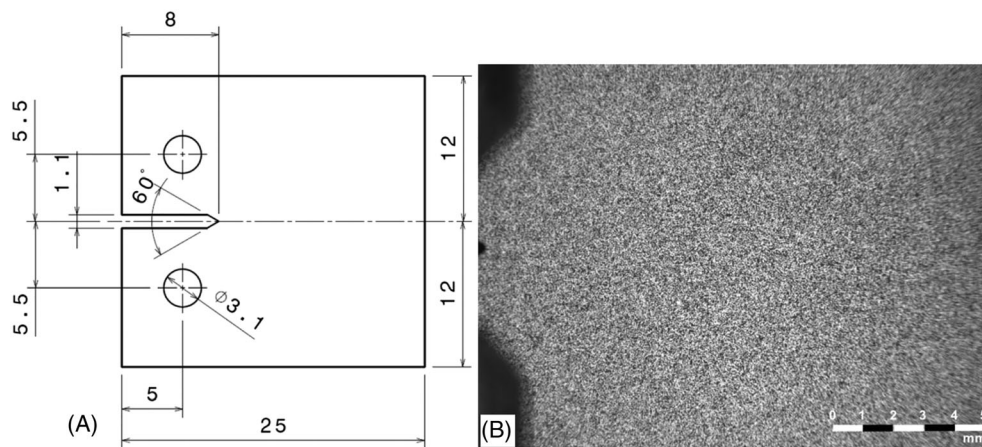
(A) Dimensions of the CT specimens (mm). (B) Illustration of the speckle pattern sprayed onto the specimen surface for making DIC measurements
